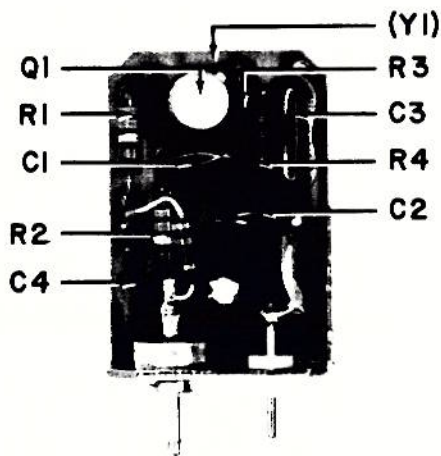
Part 13991, Crystal Oscillator P. C. Board, Component Locations
